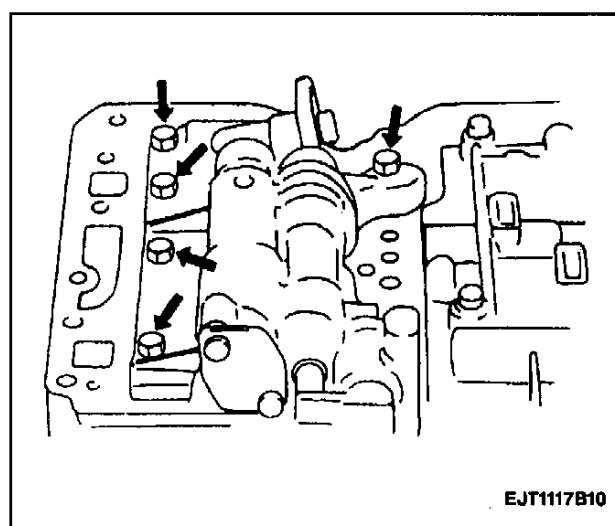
Installing Front Upper Valve Body Bolts (03-72LE, 4-Speed)
